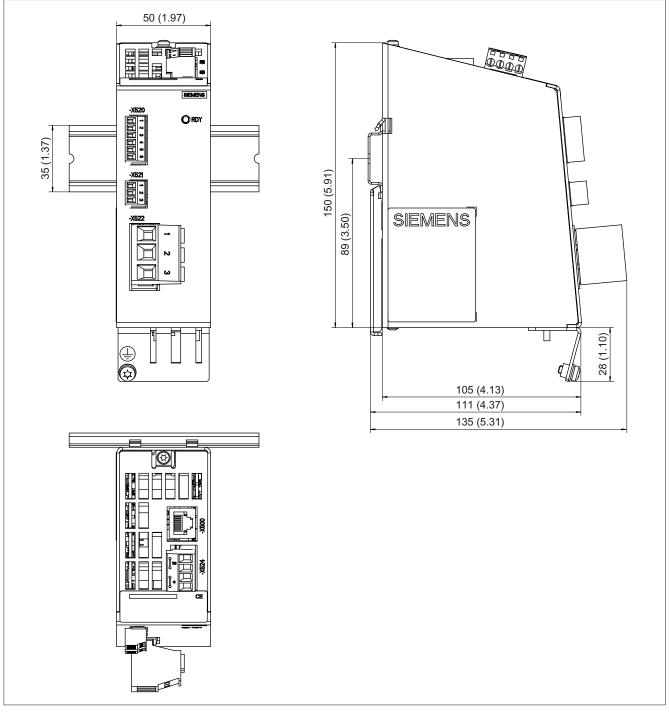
Dimension drawing of the Voltage Sensing Module VSM10, all data in mm and (inches)
